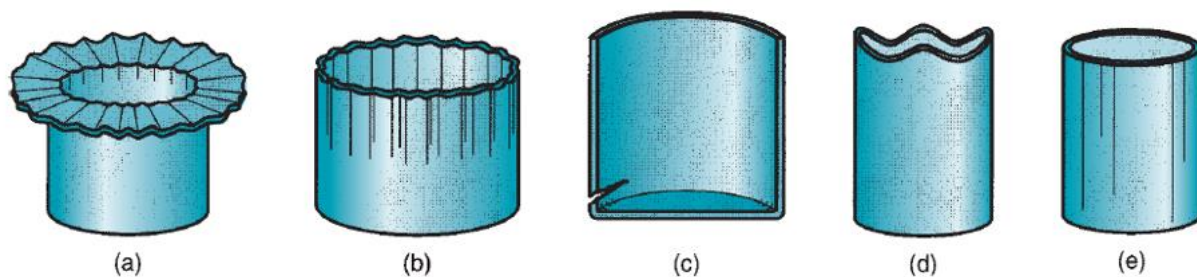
Possible deep draw failures in drawn parts: (a) Wrinkling in the flange, (b) Wrinkling in the wall, (c) Tearing, (d) Earing, and (e) Surface scratches [27]
